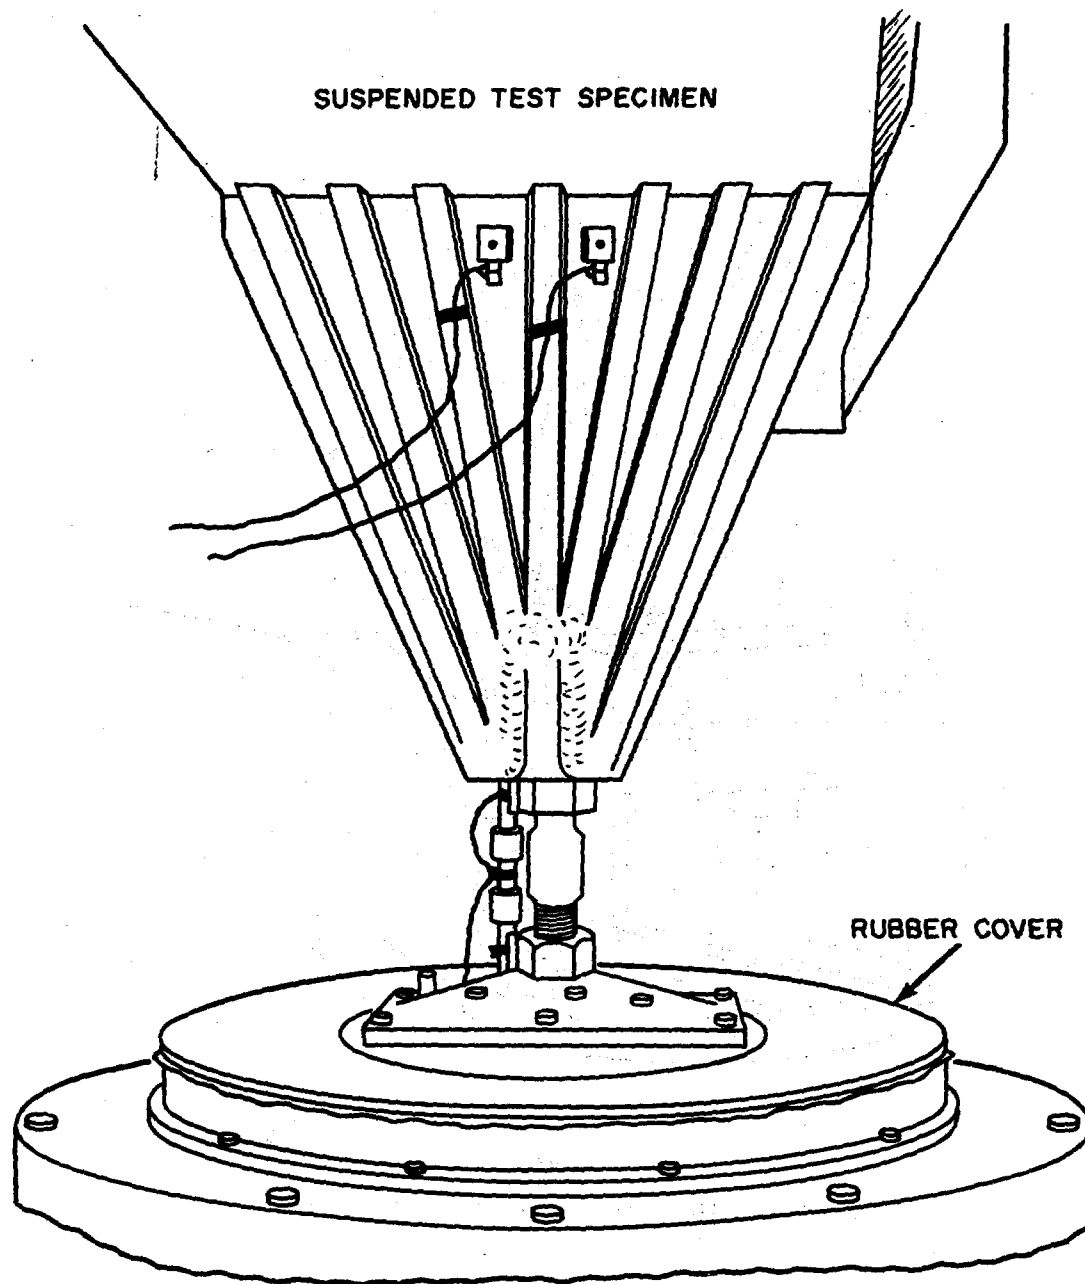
AN EXAMPLE OF A FIXTURE
